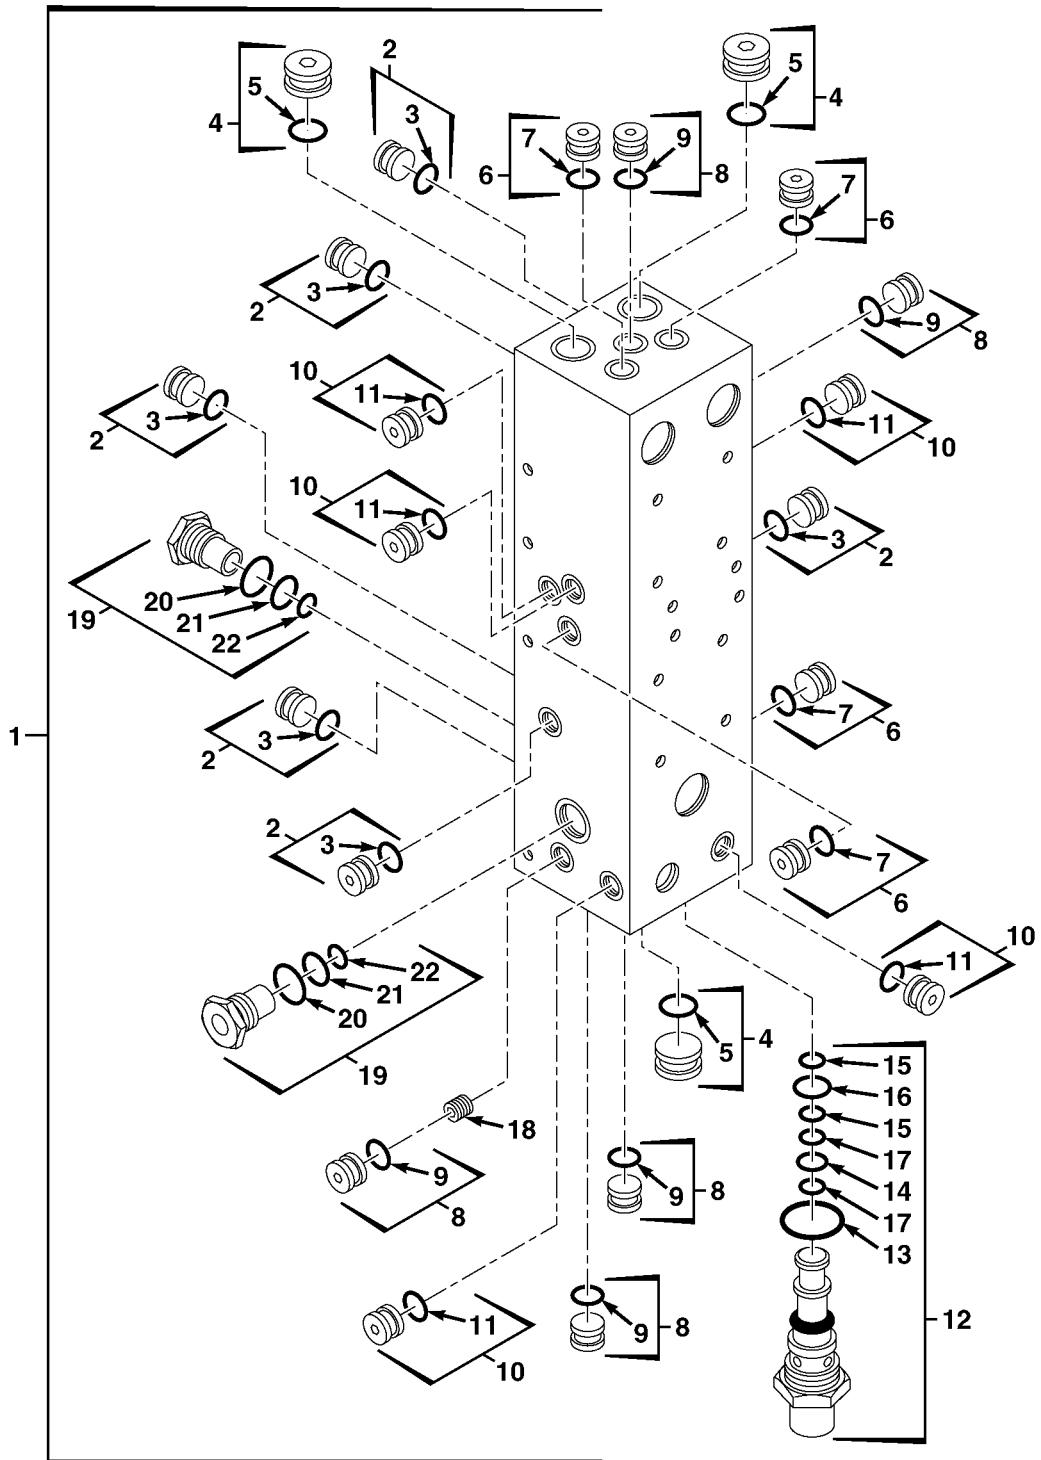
LHS MAIN MANIFOLD, RELIEF VALVES, AND LOAD CONTROL VALVES
